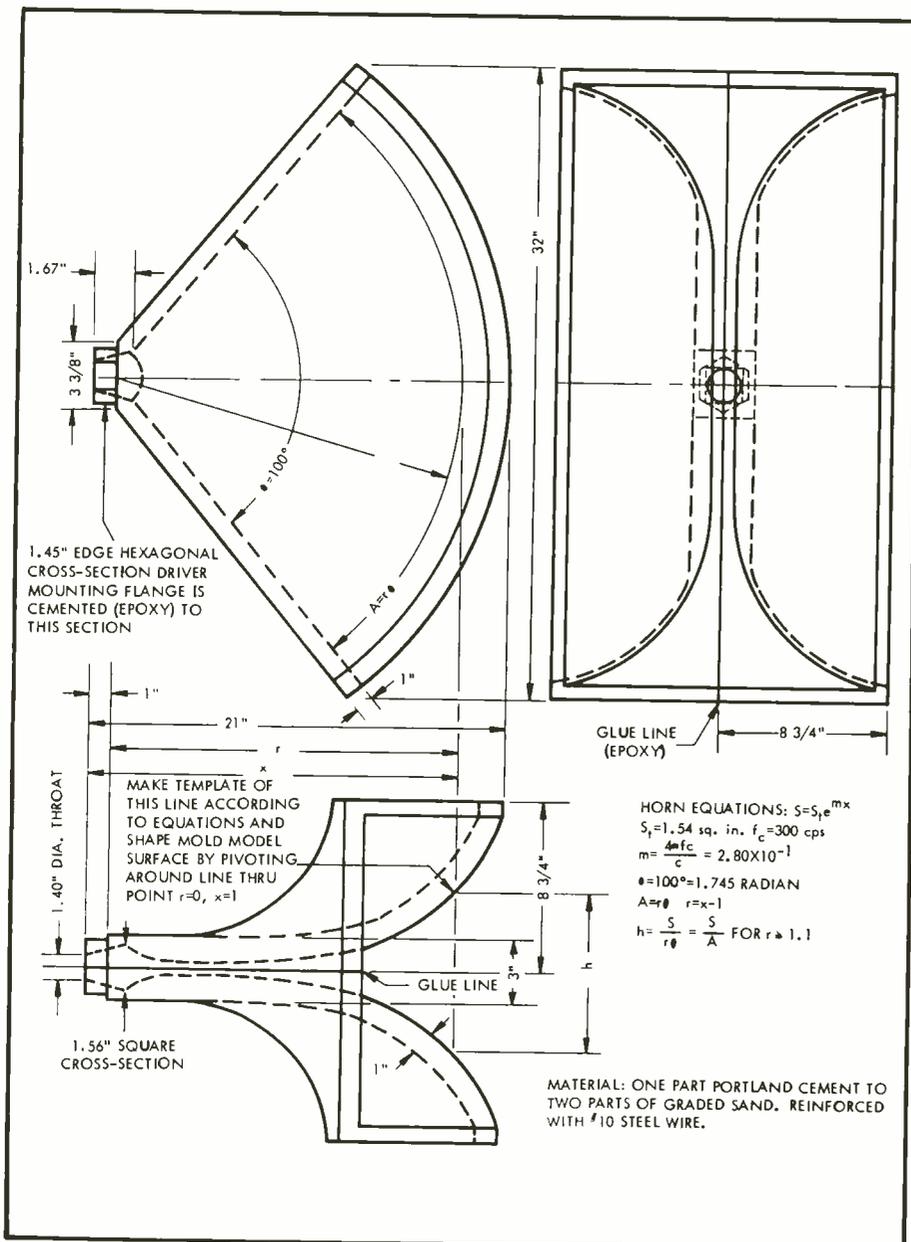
High frequency concrete exponential sectoral horn for Altec Lansing 288C driver. Horn consists of two identical castings cemented together and a hexagonal flange for mounting the driver. Flange is made from two pieces of 1/16-in. sheet steel and is not shown in this drawing.
